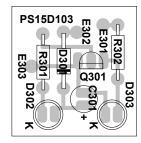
PS15D103 Buss Status Indicator Assembly component locator.
